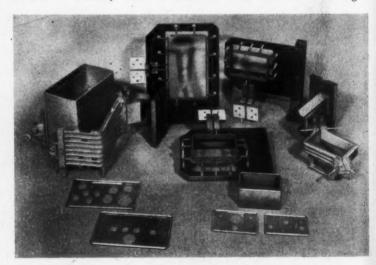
Induction coils and water-cooling jackets used for the soldering and unsoldering of thin-gauge aluminium cases containing delicate instruments.
